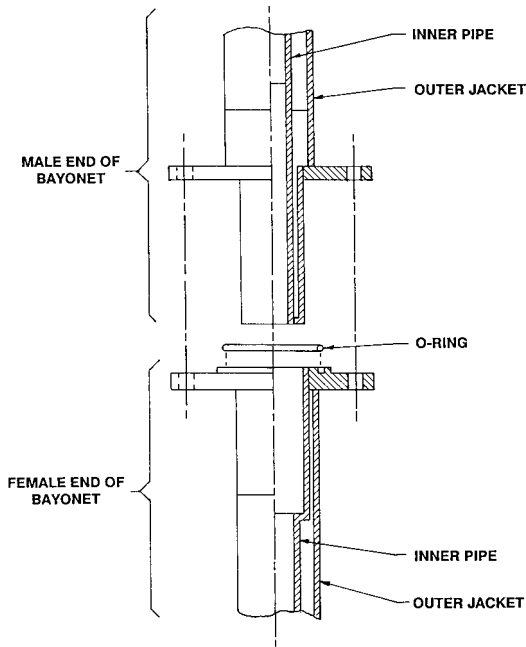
Vacuum-insulated pipe bayonet assembly.
